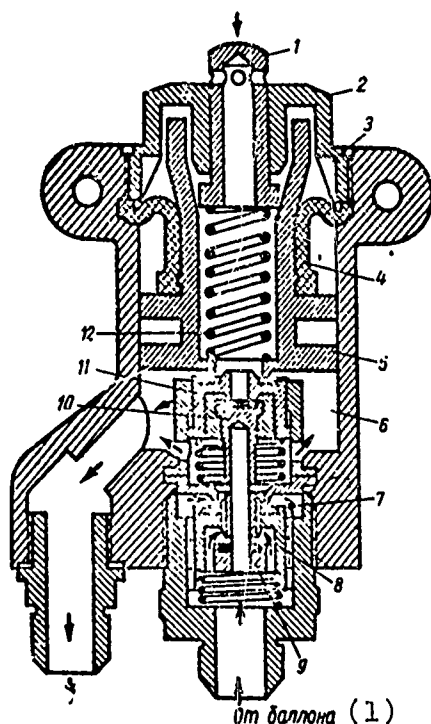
PU-7 reducing valve: 1 - pusher; 2 - nut; 3 - ring; 4 - stocking membrane; 5 - piston; 6 - middle chamber; 7 - lower cavity; 8 - large inlet valve; 9 - small inlet valve; 10 - small outlet valve; 11 - large outlet valve; 12 - reducing spring.
